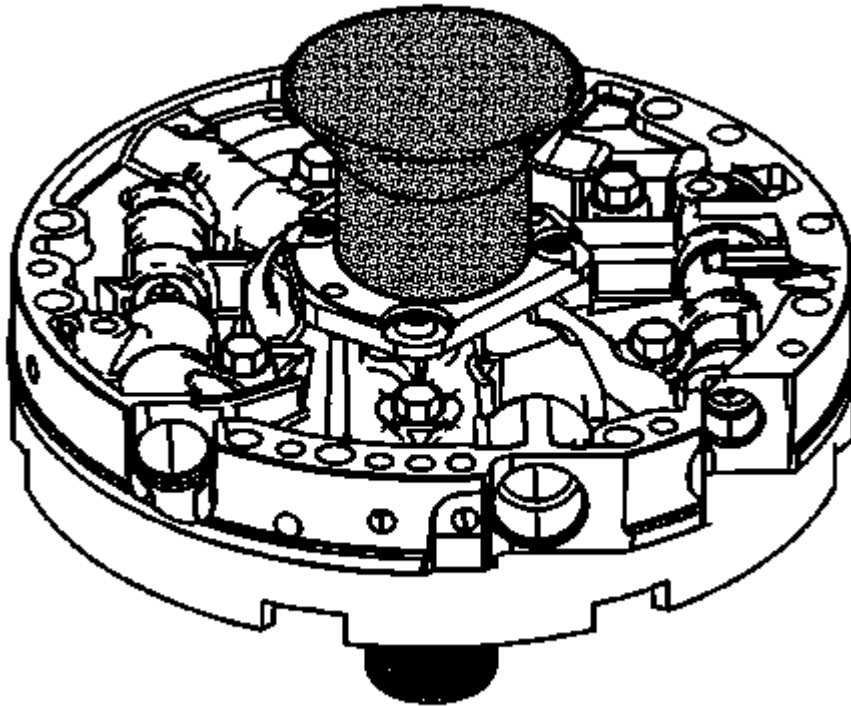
Locating Inspection Areas On Intermediate Clutch Piston
